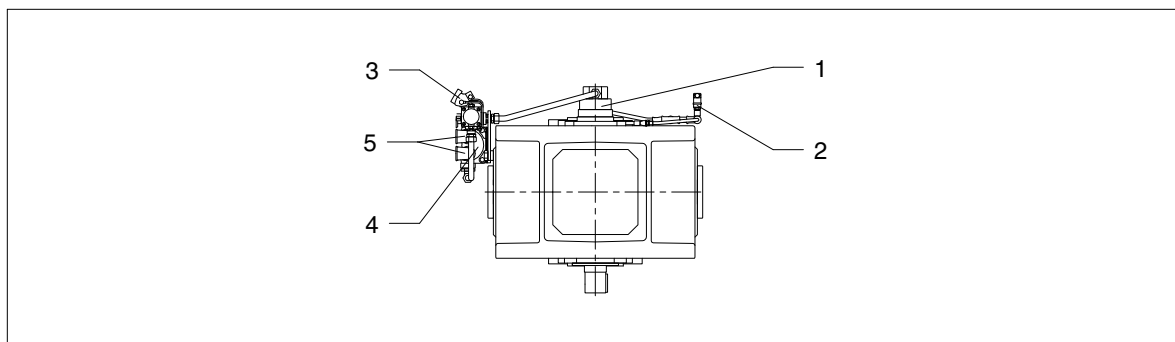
Add-on oil-supply system with water oil-cooler on gear units type H..V
